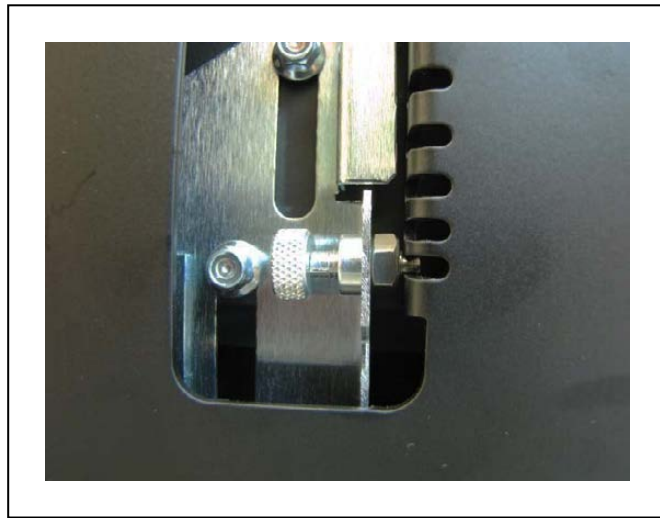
Docking Station Contact Adjusting Pull-Knob
